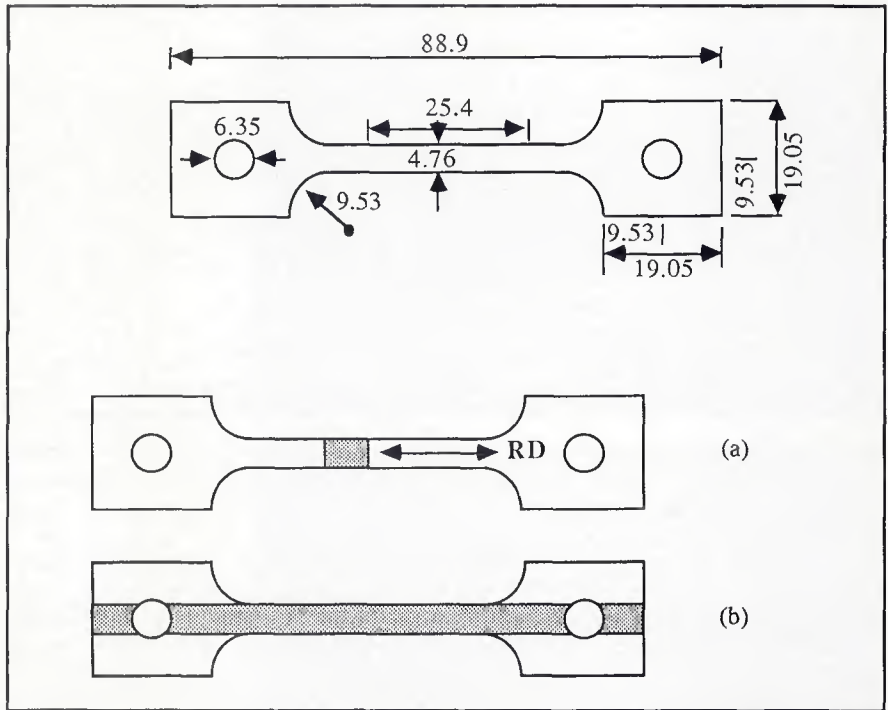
Tensile specimen configuration. A—Composite specimen; B—all-weld-metal specimen. Dimensions are in mm, and the shaded regions represent the fusion zone
